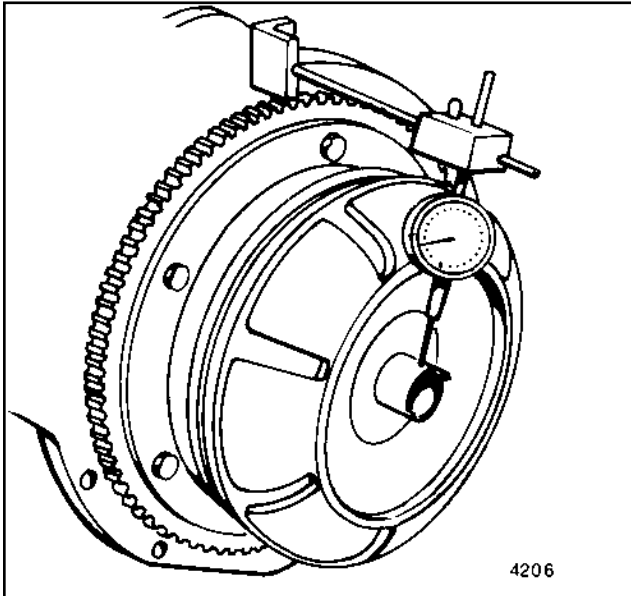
CHECKING ALIGNMENT OF TORQUE CONVERTER HUB
